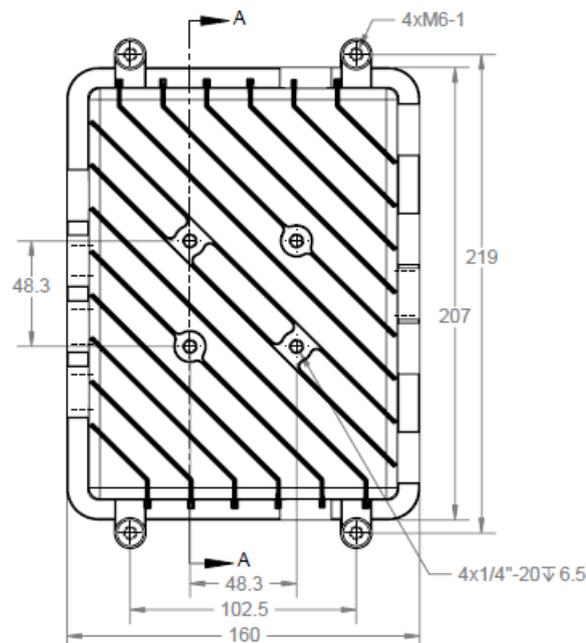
XBU ENCLOSURE MOUNTING HOLE
